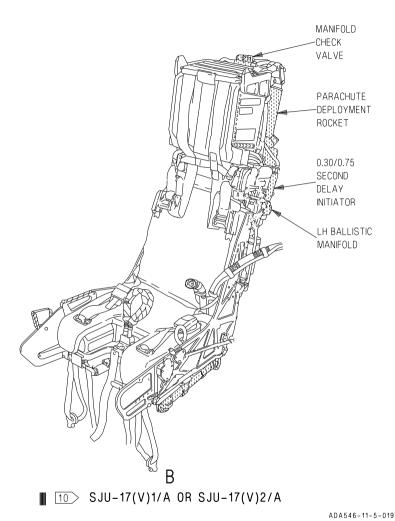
Flammable Liquids, Compressed Gasses and Explosive Devices (Sheet 5)
